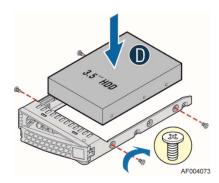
3.5" Hard Disk Drive Installation – Mounting drive to carrier
